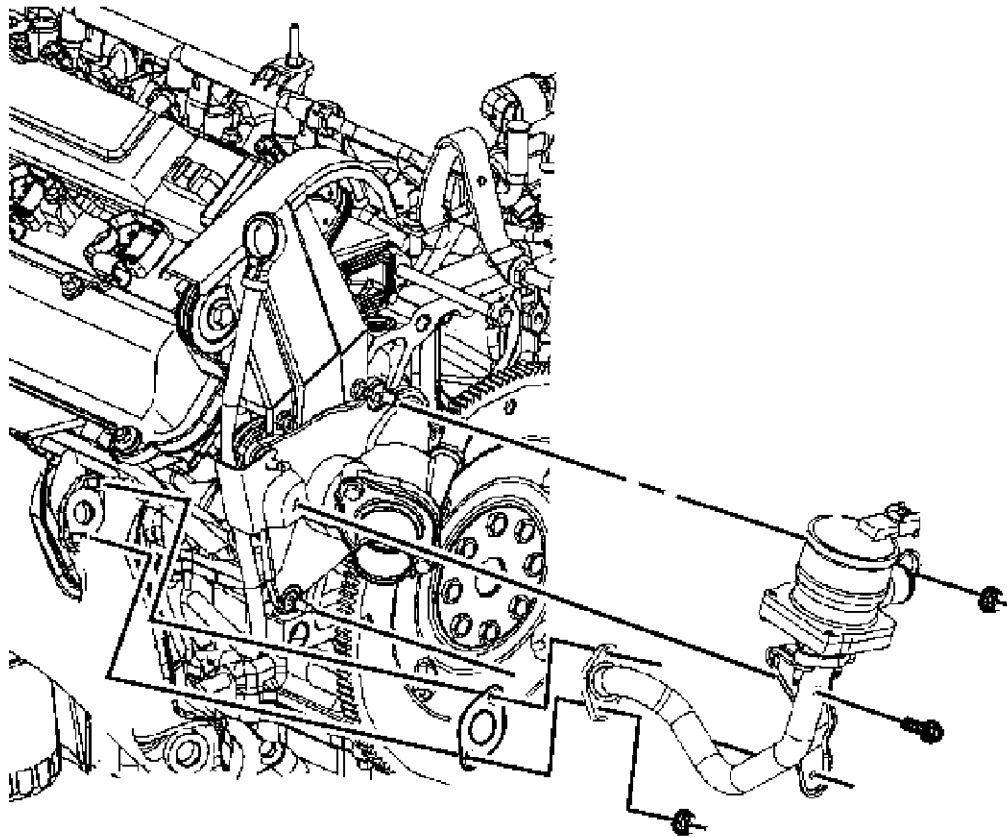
Identifying Secondary Air Injection (AIR) Valve Pipe
